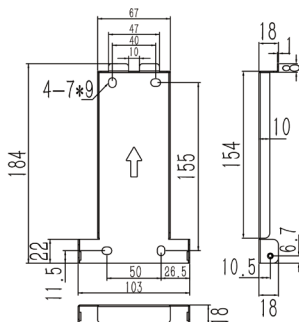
Outline dimension drawing and installation opening dimension drawing of wall-mounted hanging board
